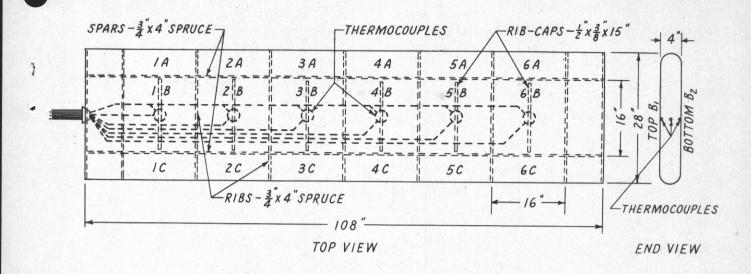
SECOND DUMMY WING SHOWING DISTRIBUTION OF THERMOCOUPLES AND SYSTEM OF IDENTIFICATION NUMBERS
